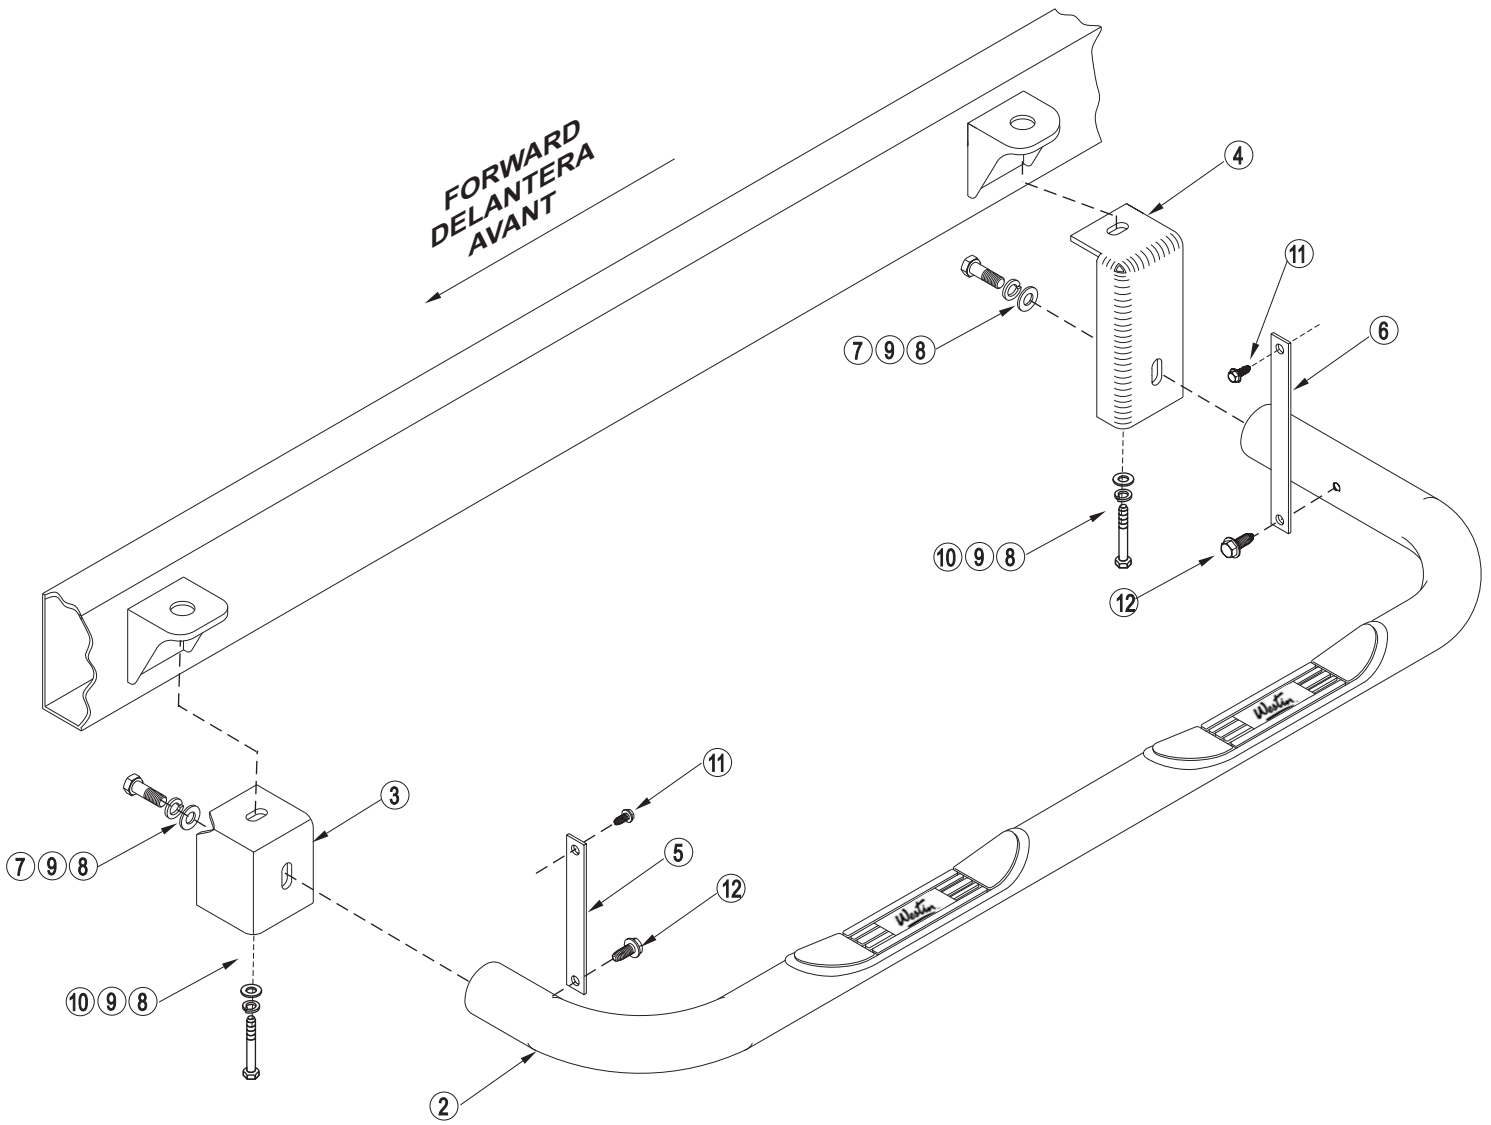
DRIVER SIDE EXTENDED CAB SHOWN
